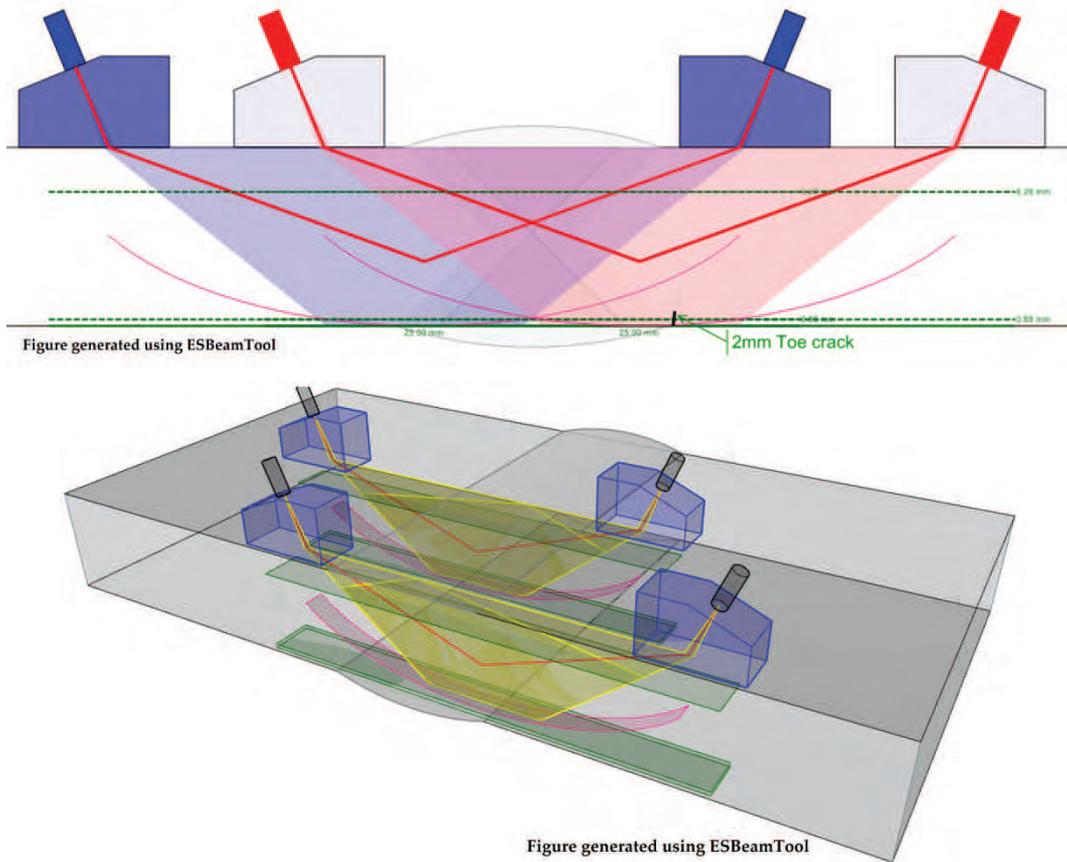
Offset scan with 2mm toe-crack on opposite wall detected
